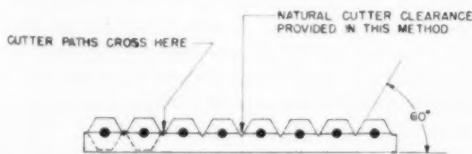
SHAPING METHOD, INVOLVING PREFERABLE CUTTER DESIGN
